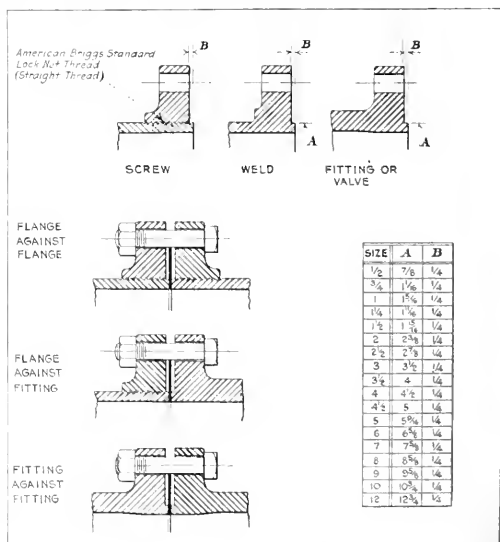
FLANGE JOINTS AND METHODS OF ATTACHING FLANGES TO PIPE, 3000-LB. HYDRAULIC AMERICAN STANDARD
